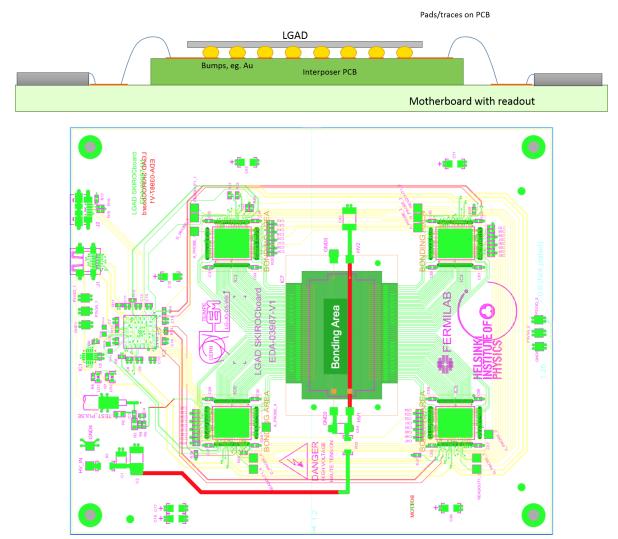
Top: A schematic drawing of the testing apparatus using the large-pad 96-channel LGAD sensors to test bump bonding and large-scale readout. The LGAD sensor is bump bonded to an interposer card, which in turn is wire bonded to a PCB with an integrated readout. Bottom: Layout of the prototype LGAD readout board. The LGAD sensor affixed in the highlighted bonding area in the center of the board is read out with four SKIROC2-CMS ASICs.
